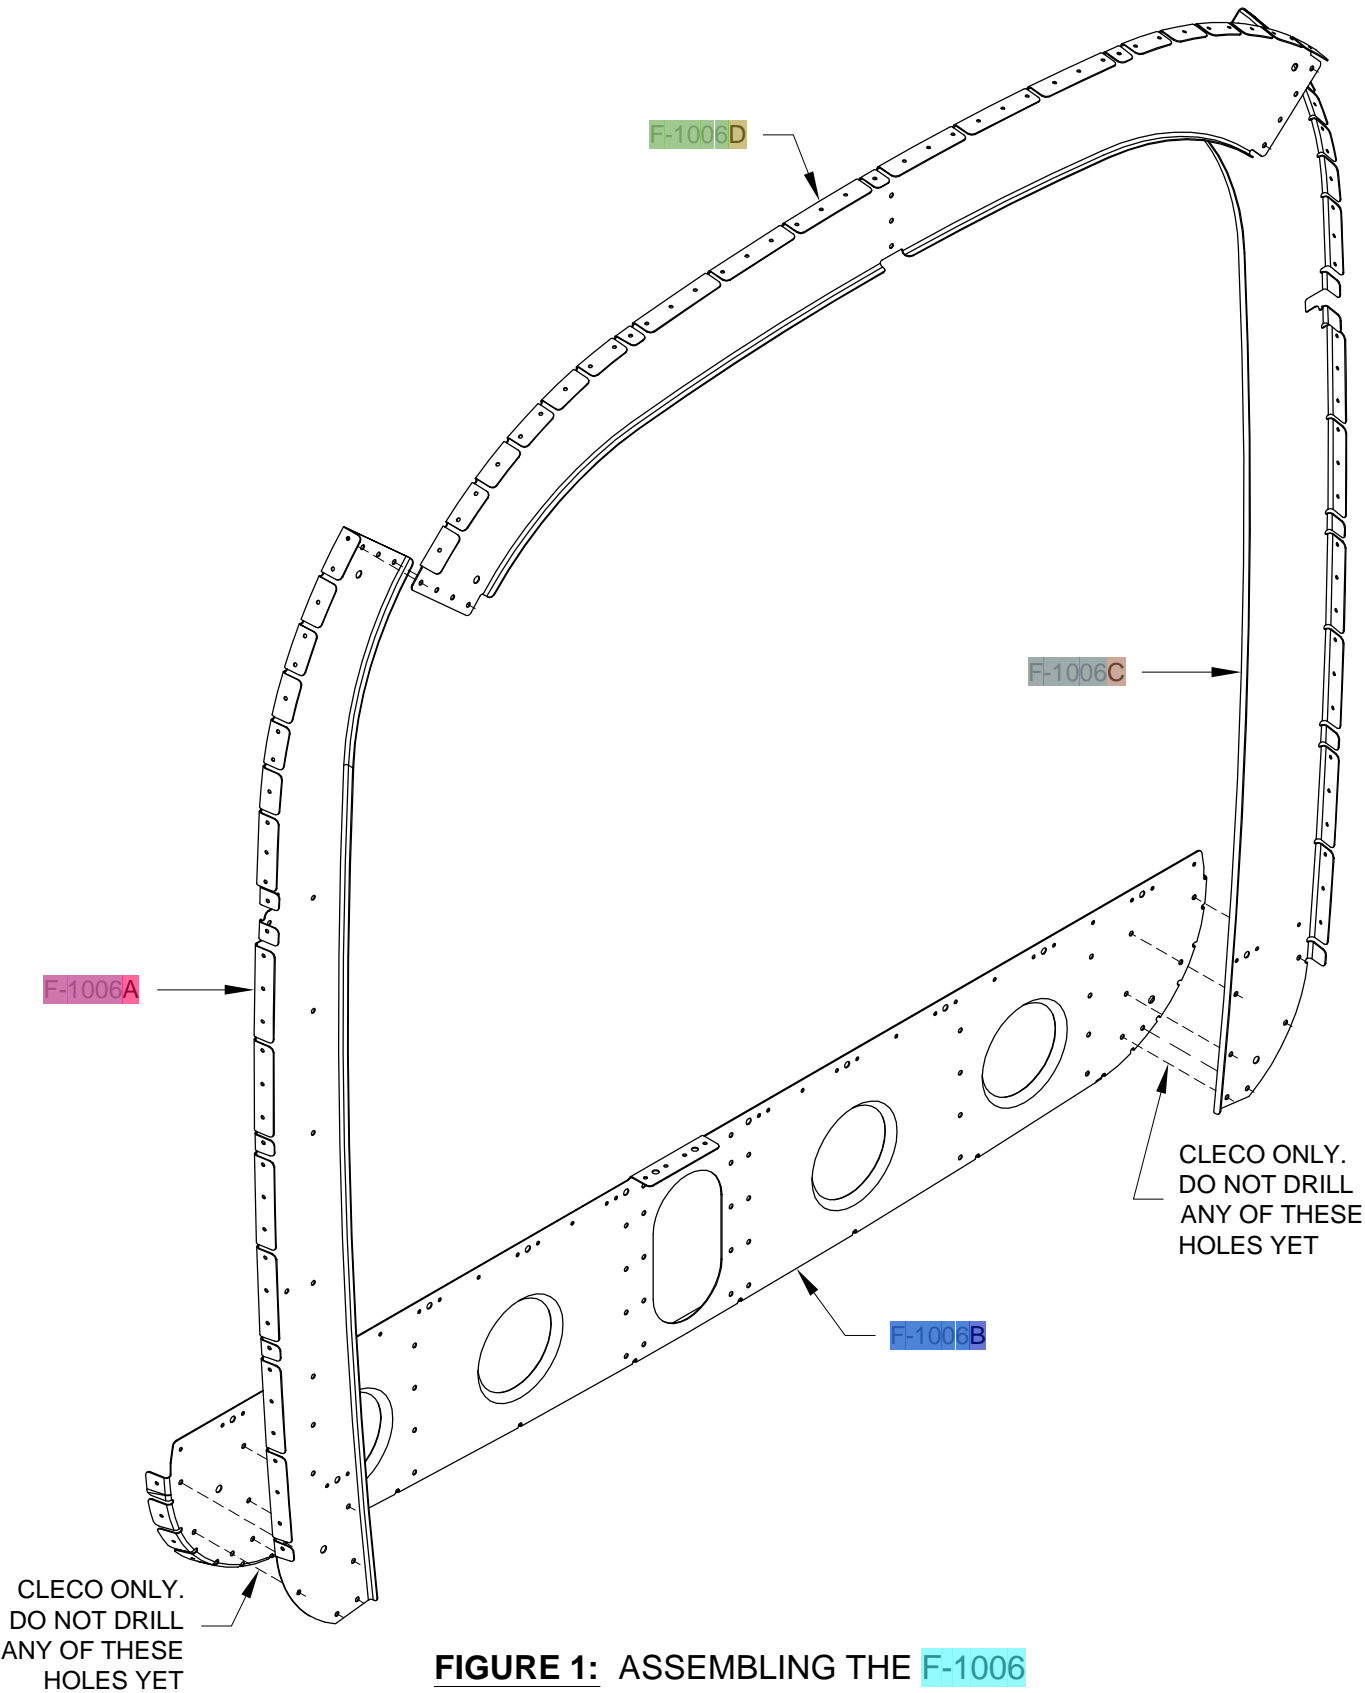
ASSEMBLING THE F-1006 BULKHEAD
